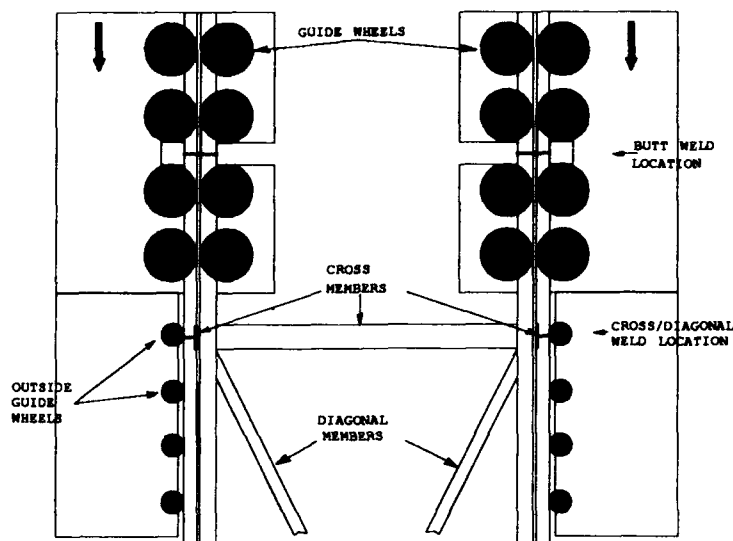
The SFP truss maker guide wheels, in combination with the drive wheels, hold the longitudinal members in place for the butt welding process.
